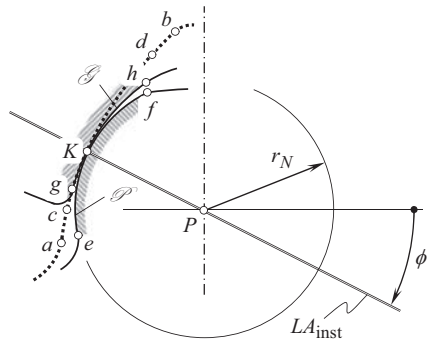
Involute tooth point in parallel-axes Novikov/conformal gearing.
